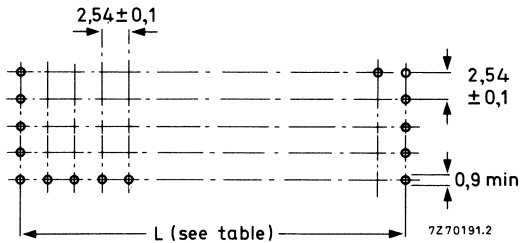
Piercing diagram for male headers and contact pins in an assembly of 2 x 10 pins. The hole diameter applies to plated-through holes.
